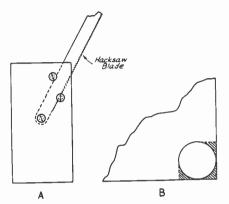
To cut rectangular holes in a chassis corner, holes may be filed out as shown in the shaded portion of B, making it possible to start the hack-saw blade along the cutting line. A shows how a singleended handle may be constructed for a back-saw blade.
